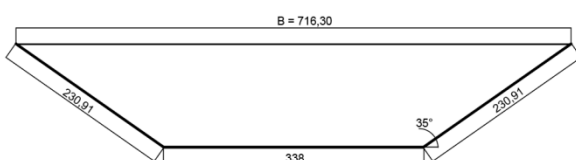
Dimensions of the M-212 conveyor belt before modification in the installed condition
